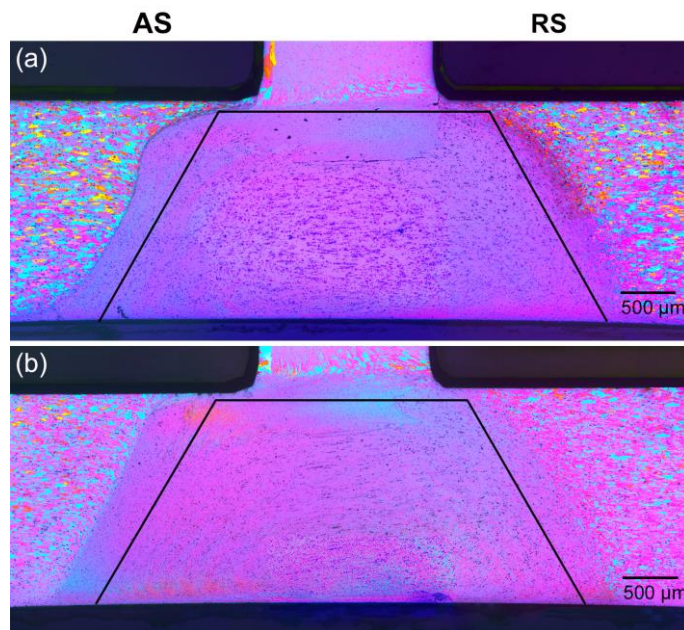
Macrographs of the welds obtained with (a) ‘cold’ parameters and (b) ‘hot’ parameters
